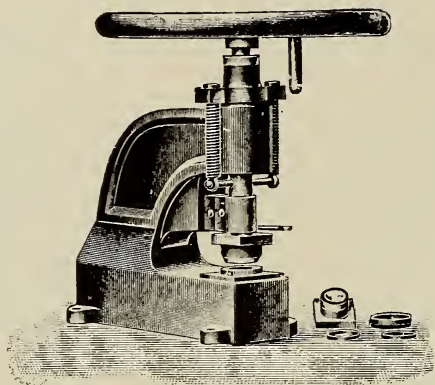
PUNCH PRESS FOR STANDARD RINGS.
